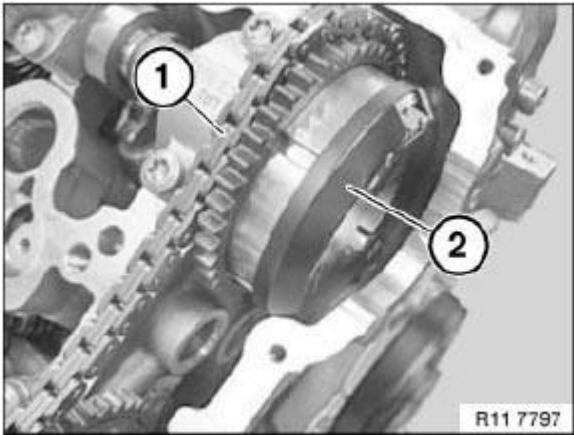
Identifying Exhaust Adjustment Unit And Timing Chain
